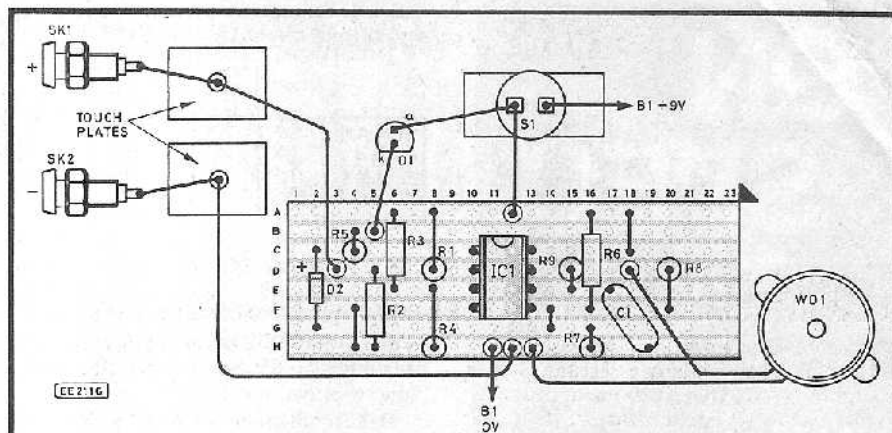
Stripboard cutting details and component layout of the Continuity Tester.
